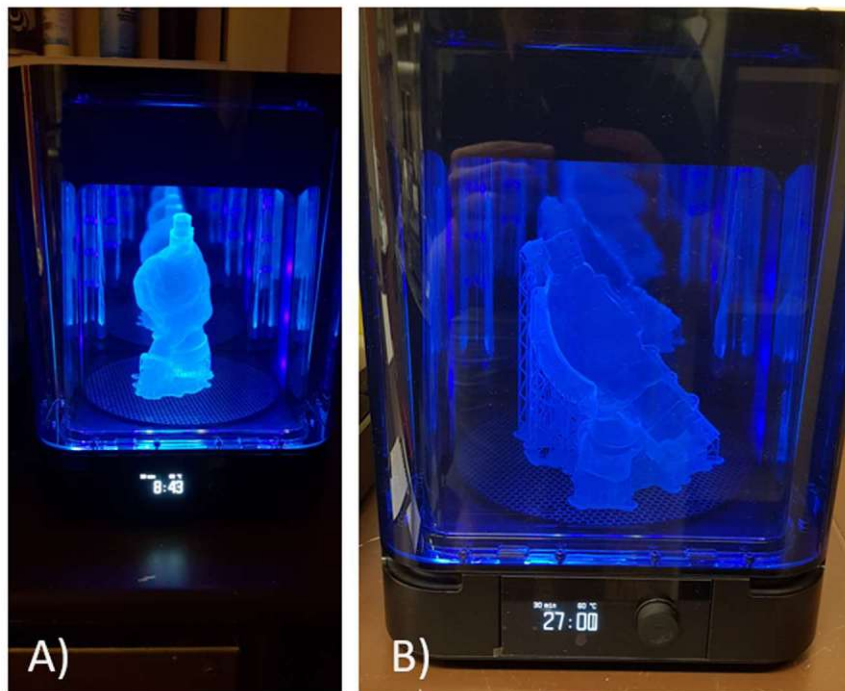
The printed core (A) and one side of the outer shell (B) used for injection molding of the modified model can be seen during the post-curing process.
